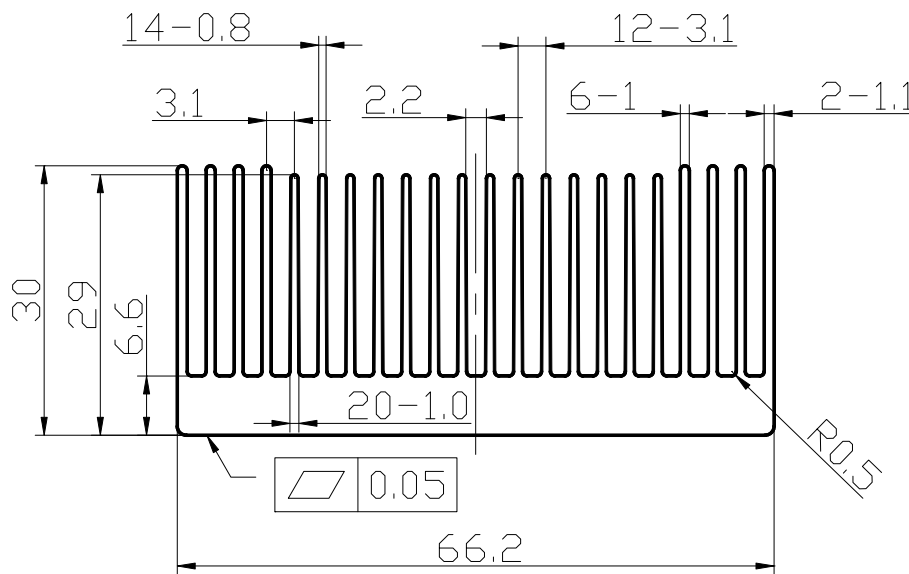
Mechanical Dimensions of Heat Sink ATHS-1/2/105/66/30A
